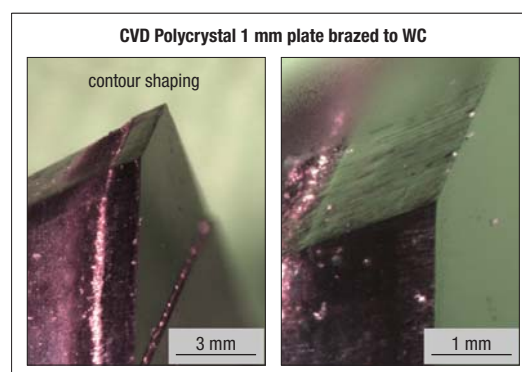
CVD polycrystalline diamond-laser shaped tool tip
